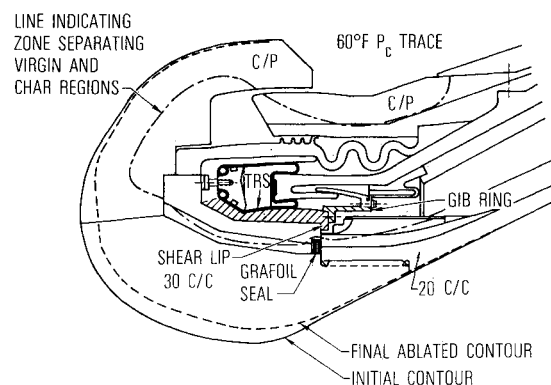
IUS SRM-1 nozzle assembly schematic.
